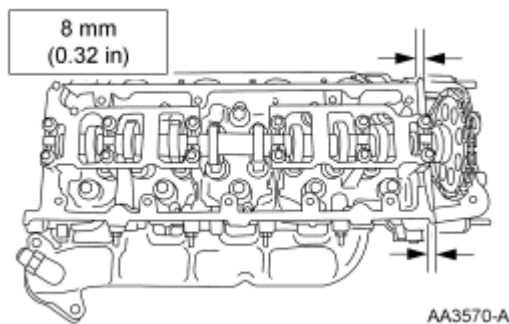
Applying Sealant At Engine Front Cover/Cylinder Head Surface (With Specifications)
